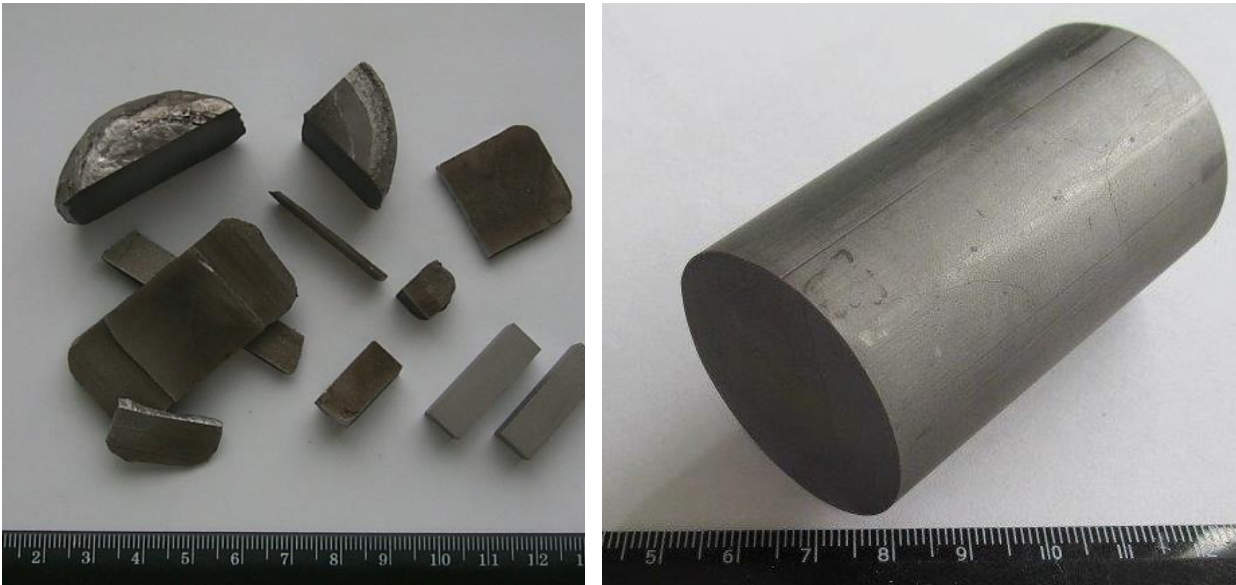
Images of Ta_2Be_{17} billets after cutting by wire EDM.
